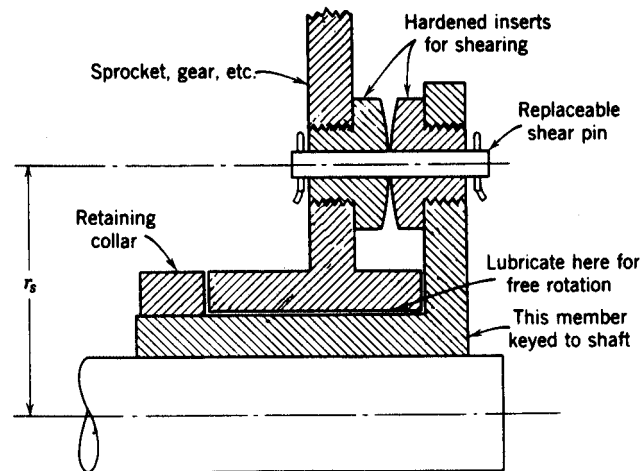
An arrangement with a flange-mounted shear pin. The hardened shearing inserts could be omitted, particularly if overloads are expected only infrequently or if necked-down shear pins are used (reprinted from Kepner et al., 1978).
